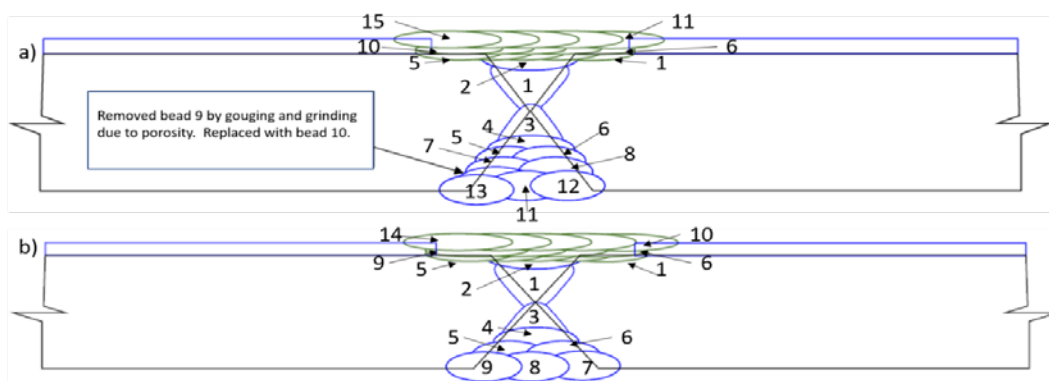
Bead placement and pass order overlay for (a) P91/Ni201 and (b) P91/C22 plate butt welds
